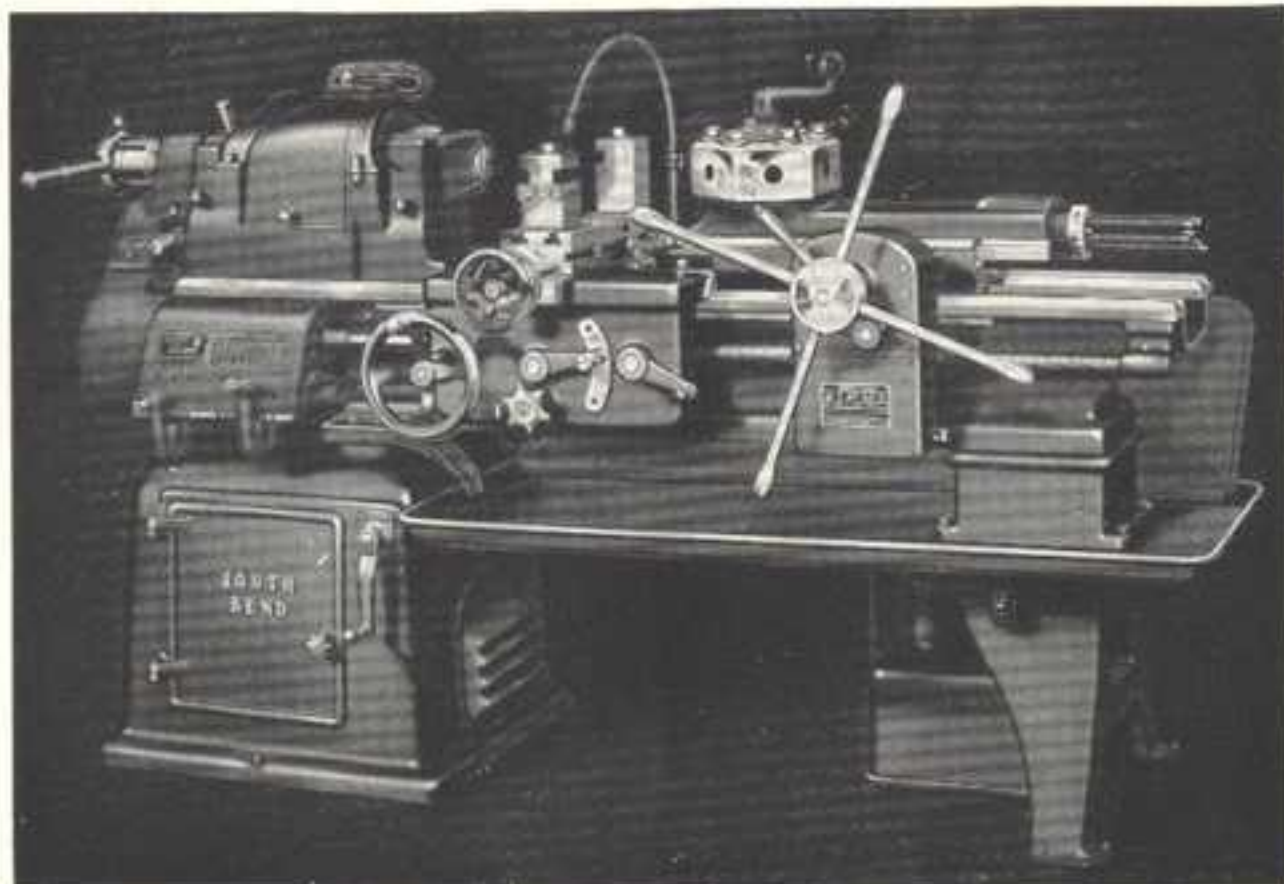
No. 2-H South Bend Turret Lathe with Power Feed Bed Turret
